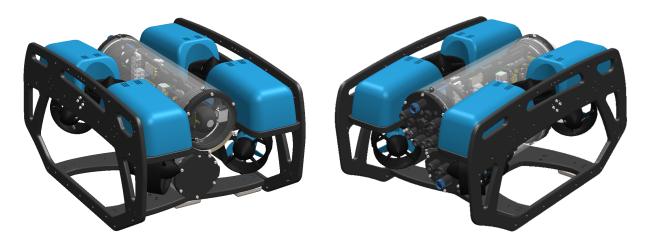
Final AROV assembly model (front view on left, rear view on right).
